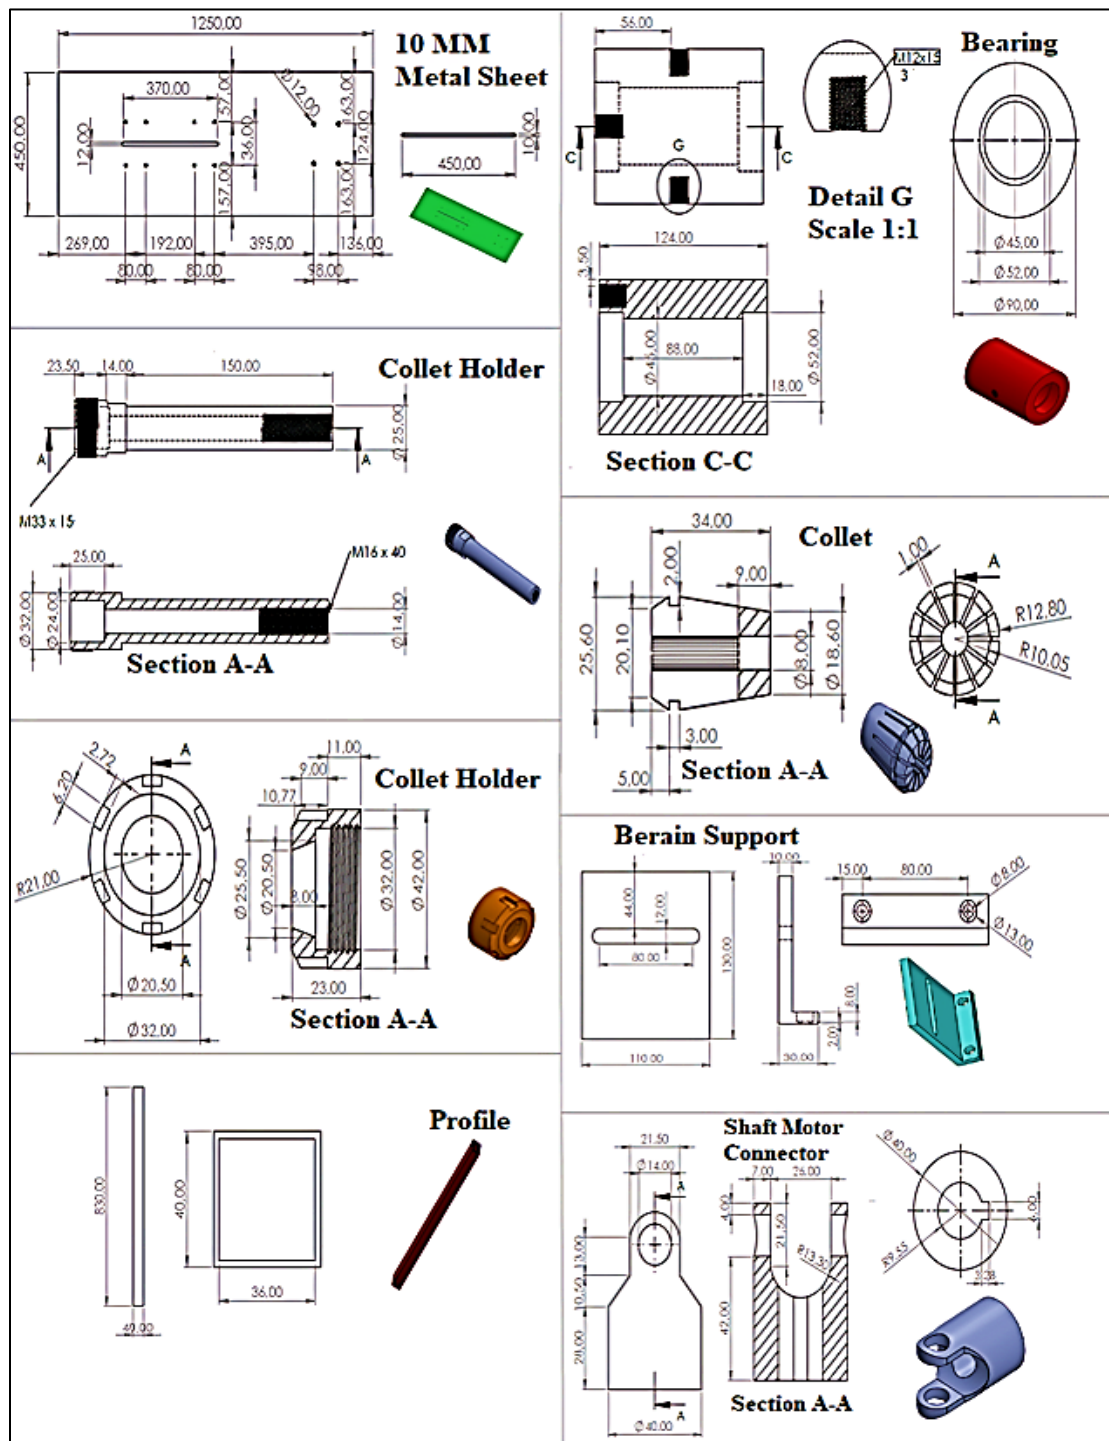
Technical drawing of rotational bending fatigue testing machine equipment
